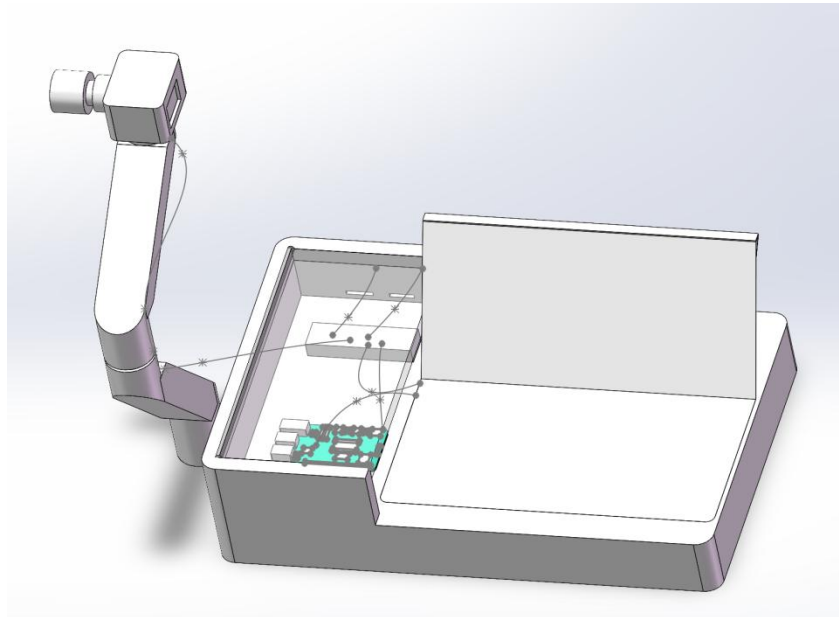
Isometric view of the outdoor enclosure and adjustable camera mounting structure.
